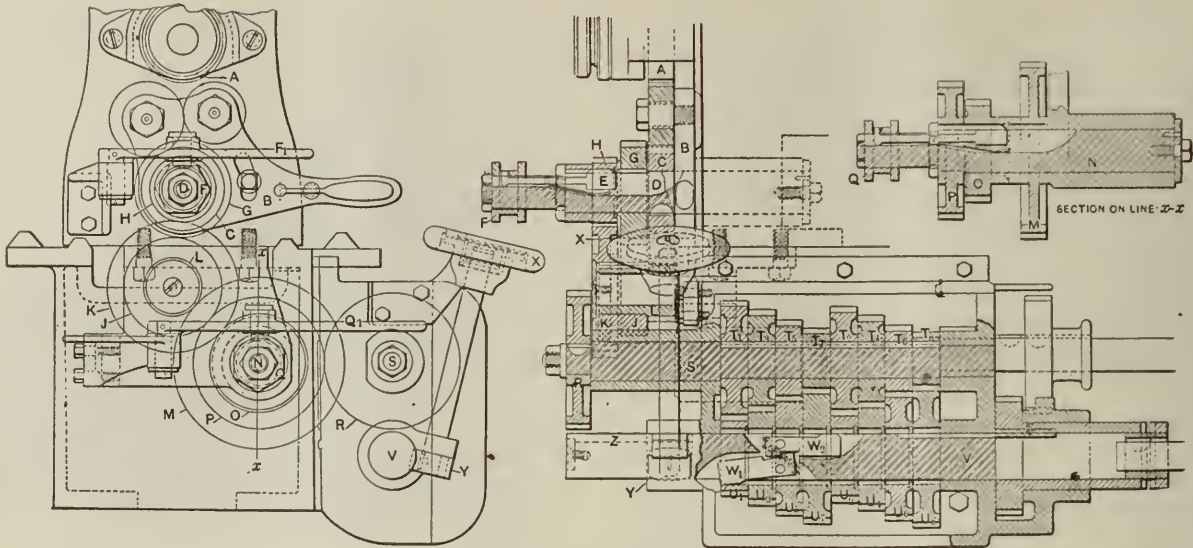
Feed Change Mechanism; Double Sliding Key for Gear Box.
